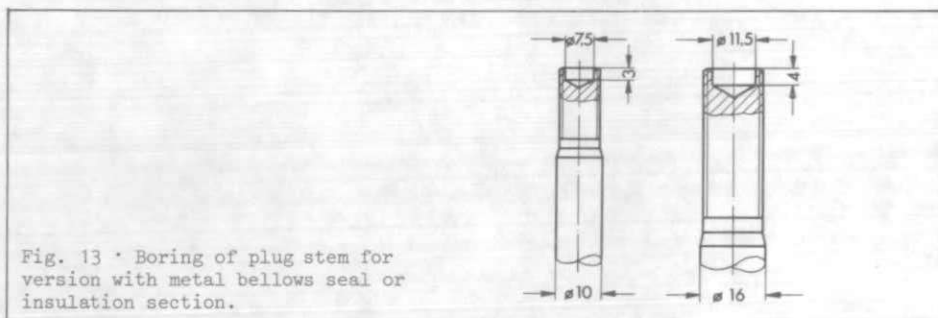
Boring of plug stem for version with metal bellows seal or insulation section.
